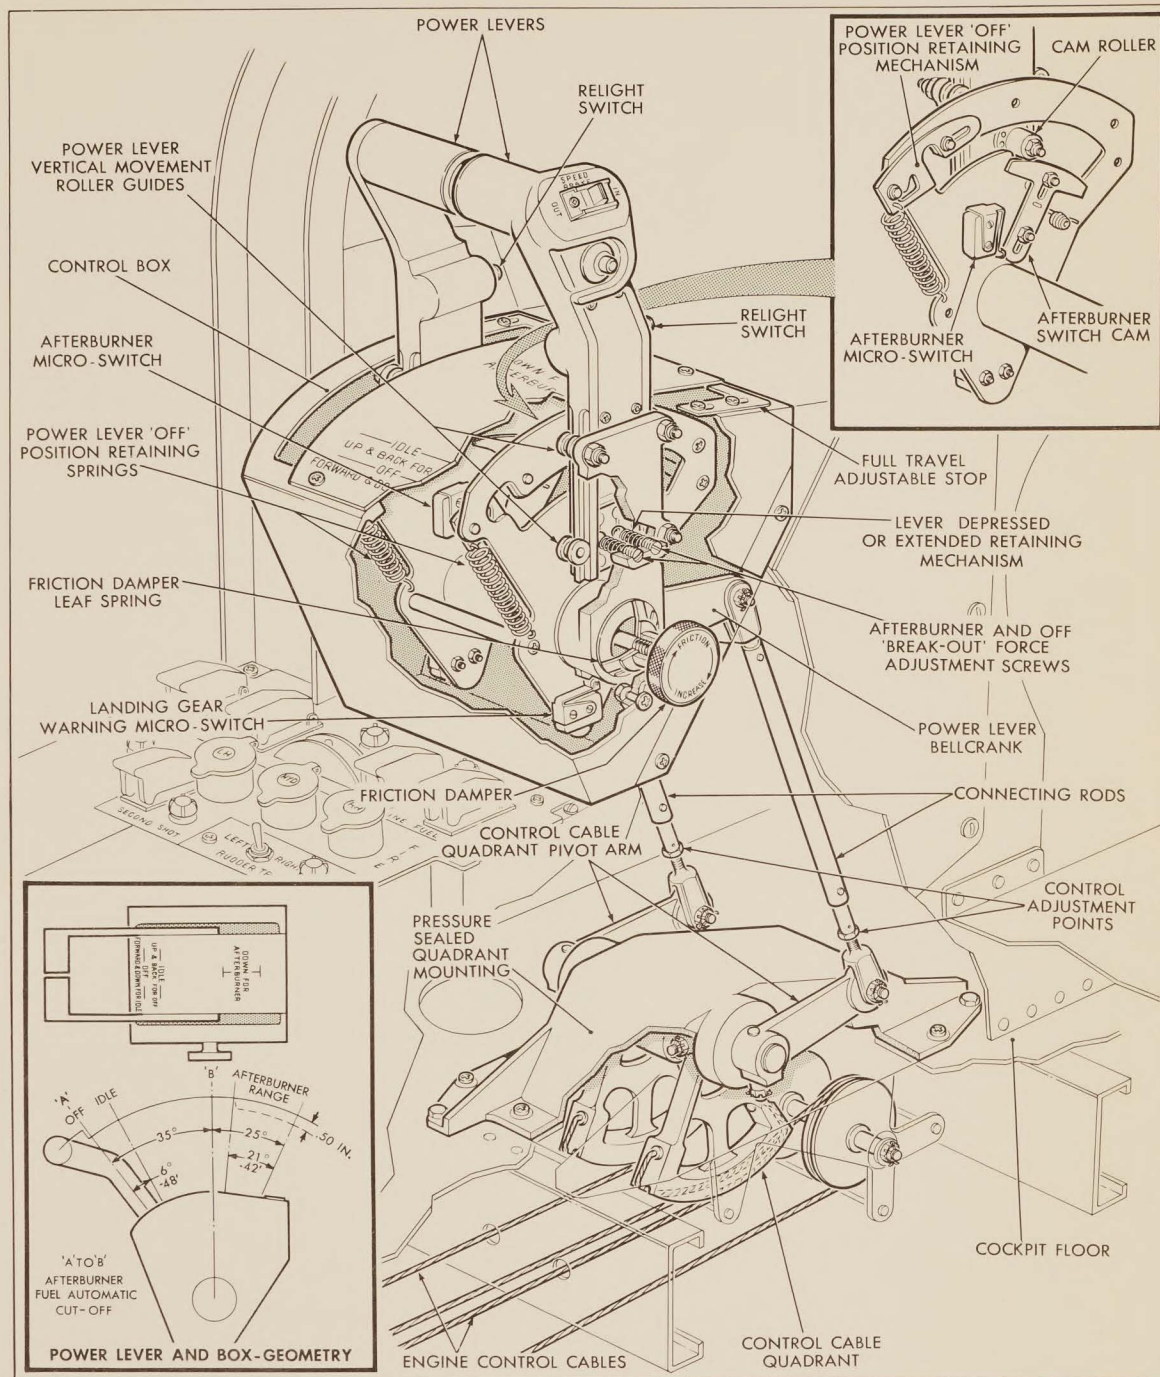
ENGINE CONTROLS - COMPONENT LAYOUT
